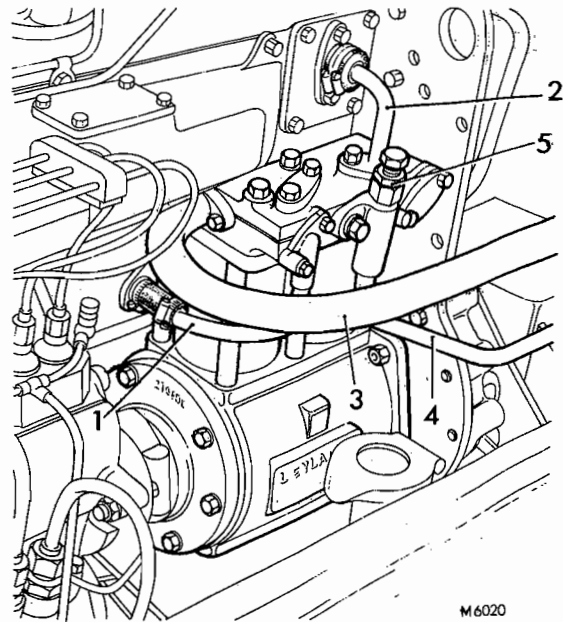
COMPRESSOR IN POSITION ON ENGINE
